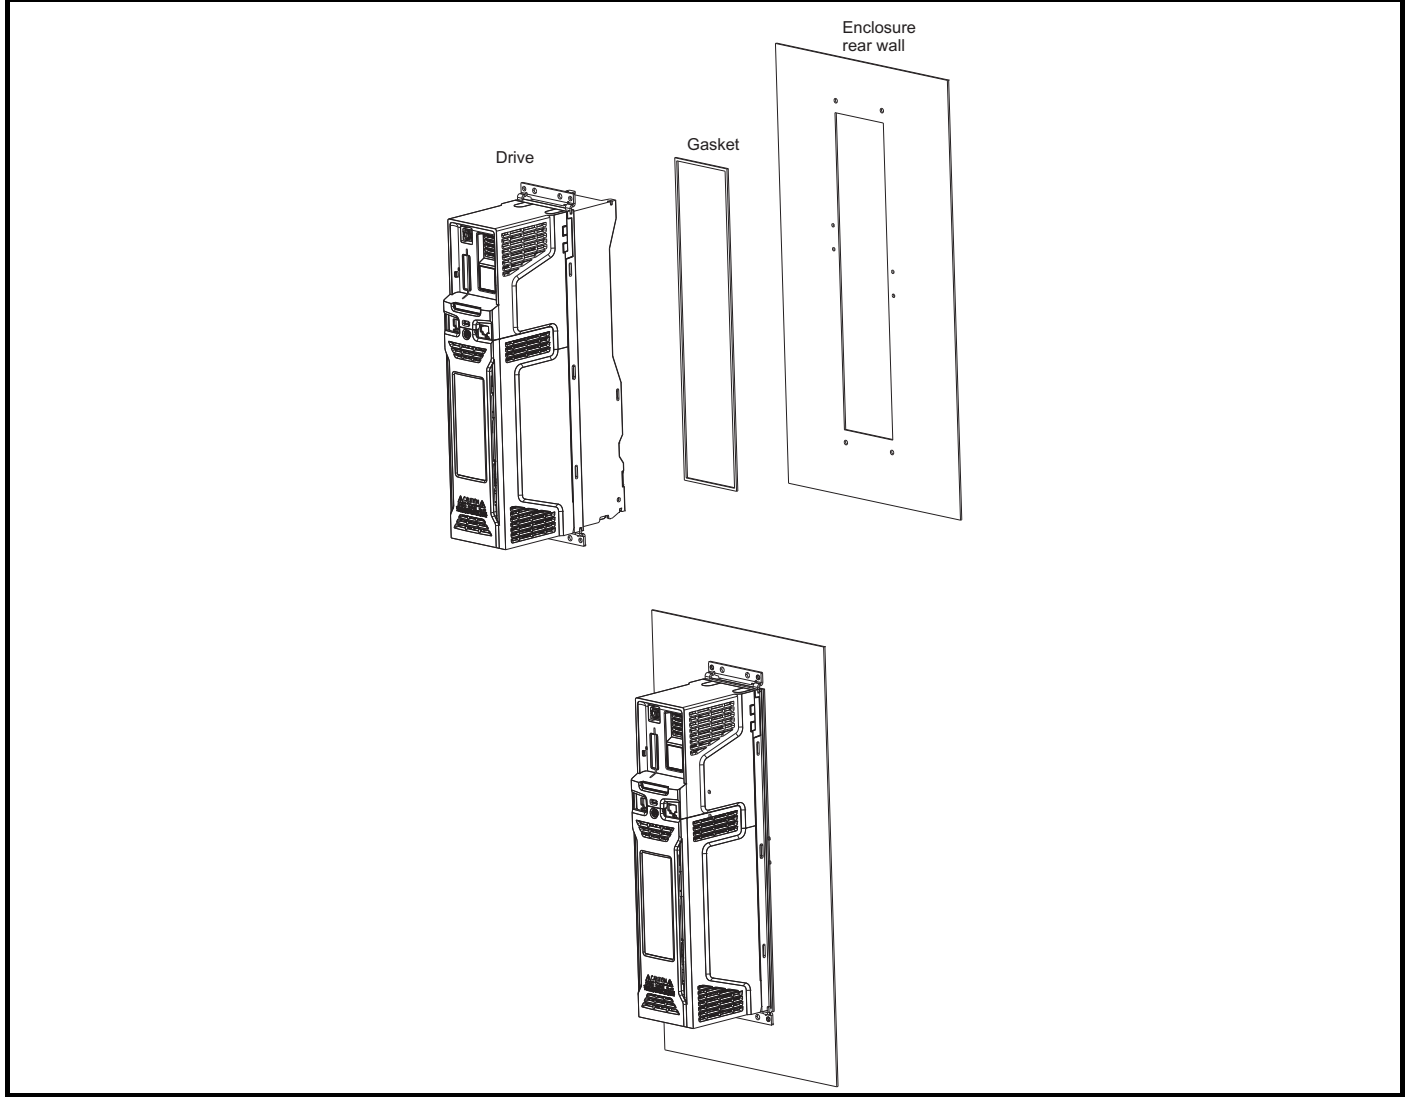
Example of IP65 (sizes 3 to 7) (NEMA 12) through-panel layout
